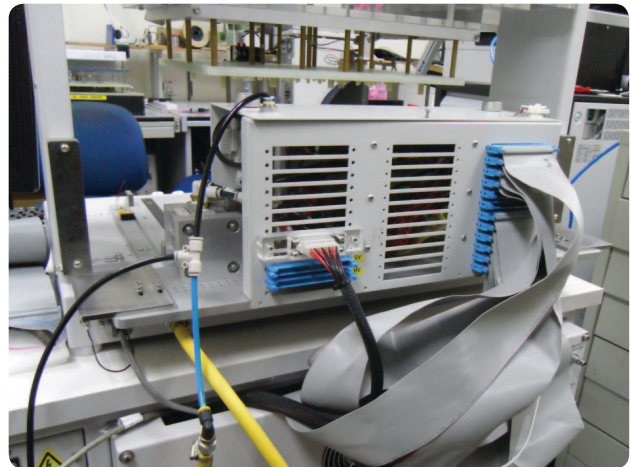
Back view of customized MTS 160 fixture adaptor where 64-pin flat cables are connected
